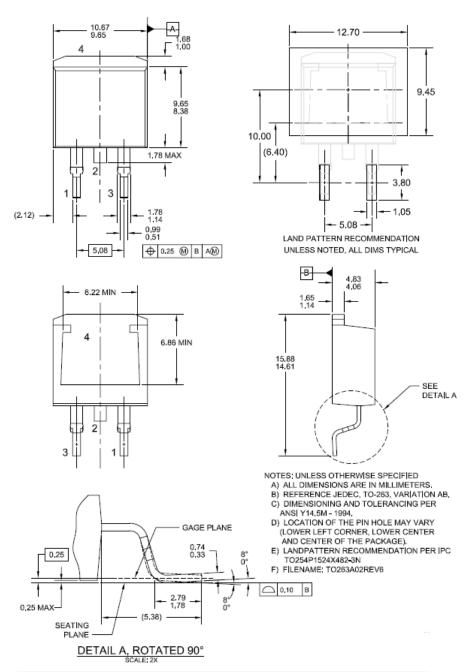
TO-263 2L (D2PAK) - 2LD, TO263, SURFACE MOUNT
